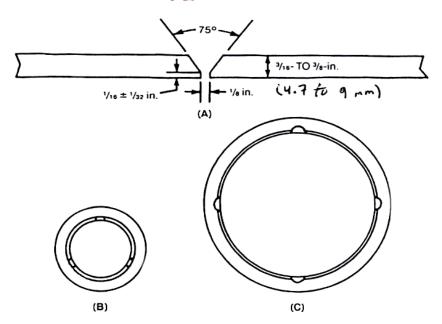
Large-diameter pipe joint preparation. (A) Single-V-groove joint design. (B) Three tack welds are placed 120° apart for pipe up to 6 in. in diameter. (C) Four tack welds are placed 90° apart on pipe that is from 8 to 12 in. [200 to 300 mm] in diameter. Note, again, that tack welds must not be full-penetration welds.
